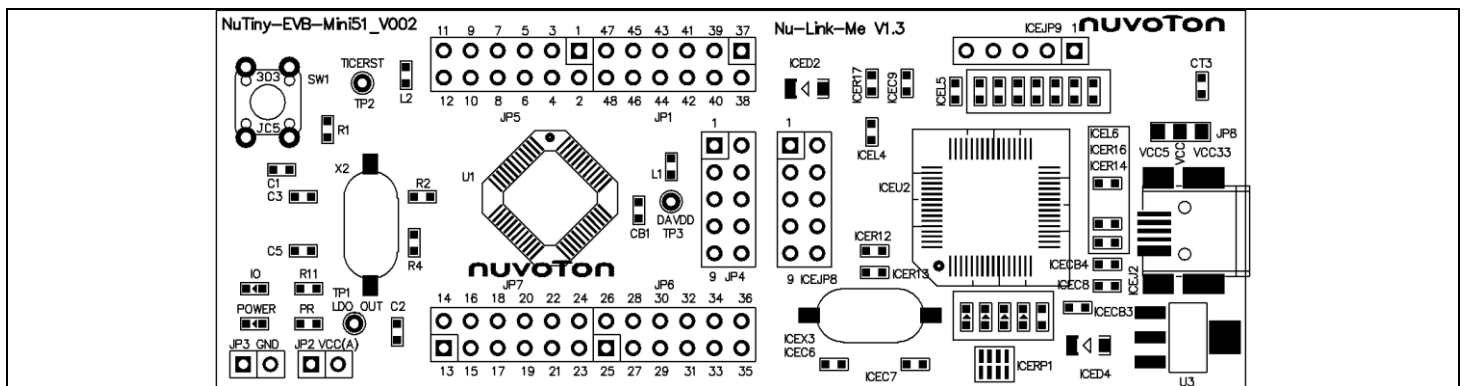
NuTiny-SDK-Mini51 PCB Placement
